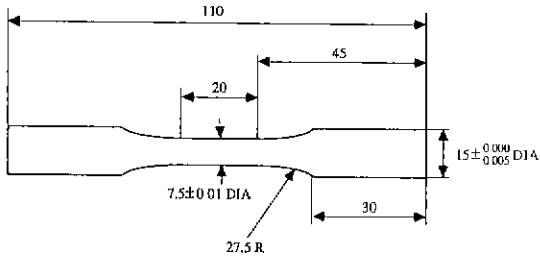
Al₂O₃ tension specimen (dimensions in mm).
